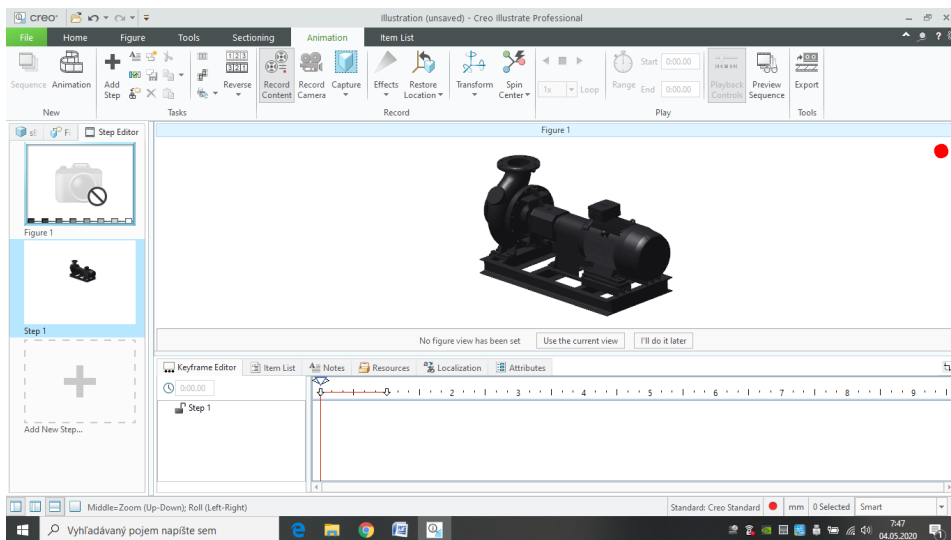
Open assembly of the SPIRAM 150 pump in Creo Illustrate
